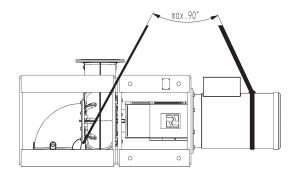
Fastening the lifting gear to the pump unit in a horizontal position
